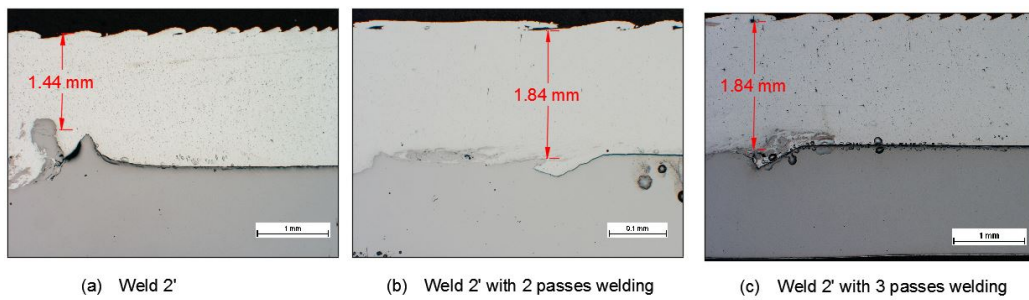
The effective thickness of aluminium alloy sheet of weld 2' and its multi-pass welds.
